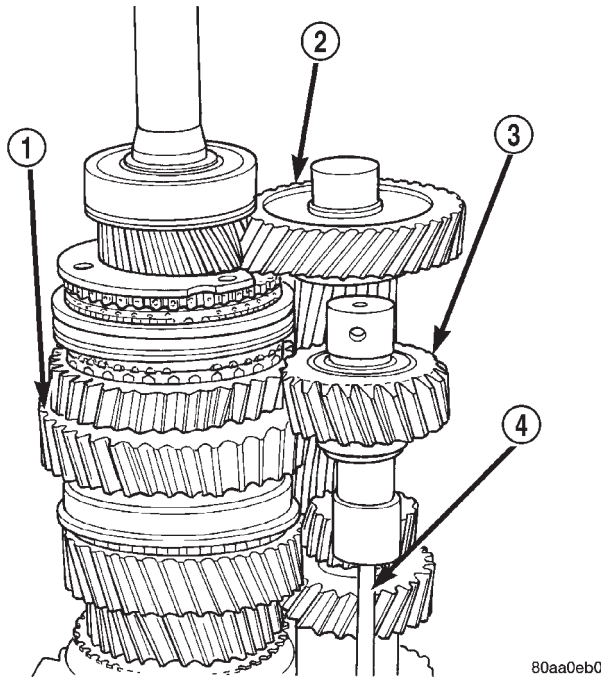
COUNTERSHAFT ON FIXTURE
